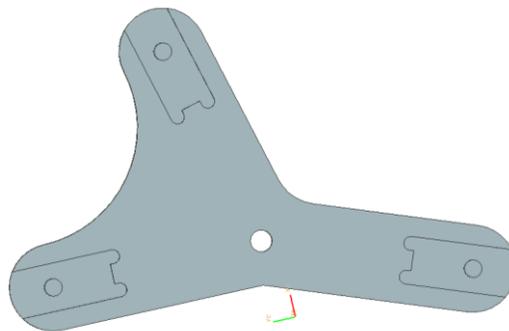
Third revision of the tube plug joint design. Pre-milled locating pins used.
